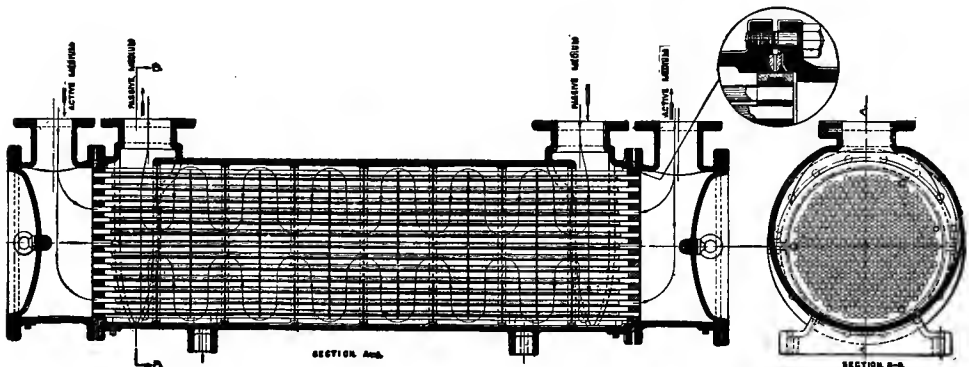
Sectional view of an S. & K. Oil Cooler, manufactured by The Schutte & Koerting Company.
